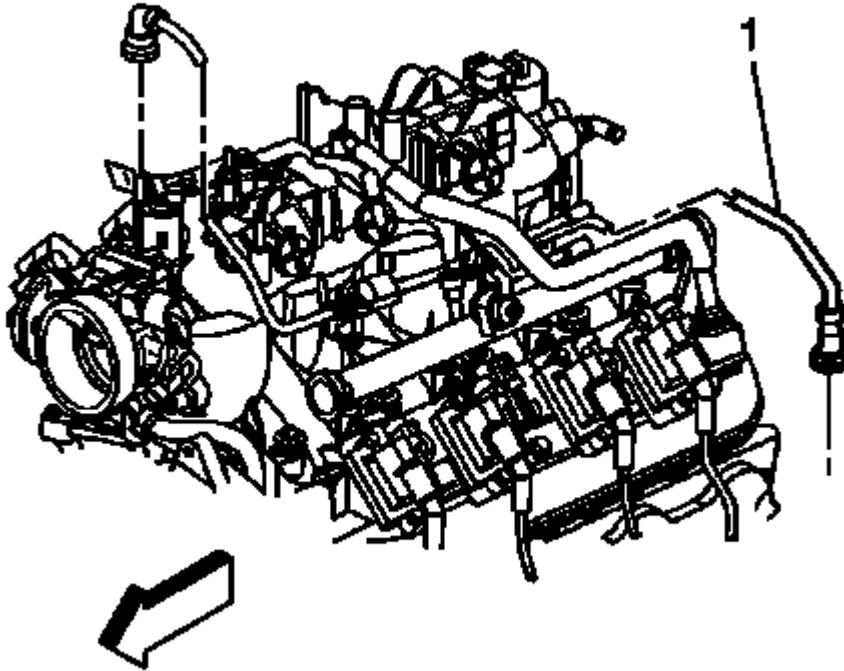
View Of EVAP Purge Solenoid Vent Tube
